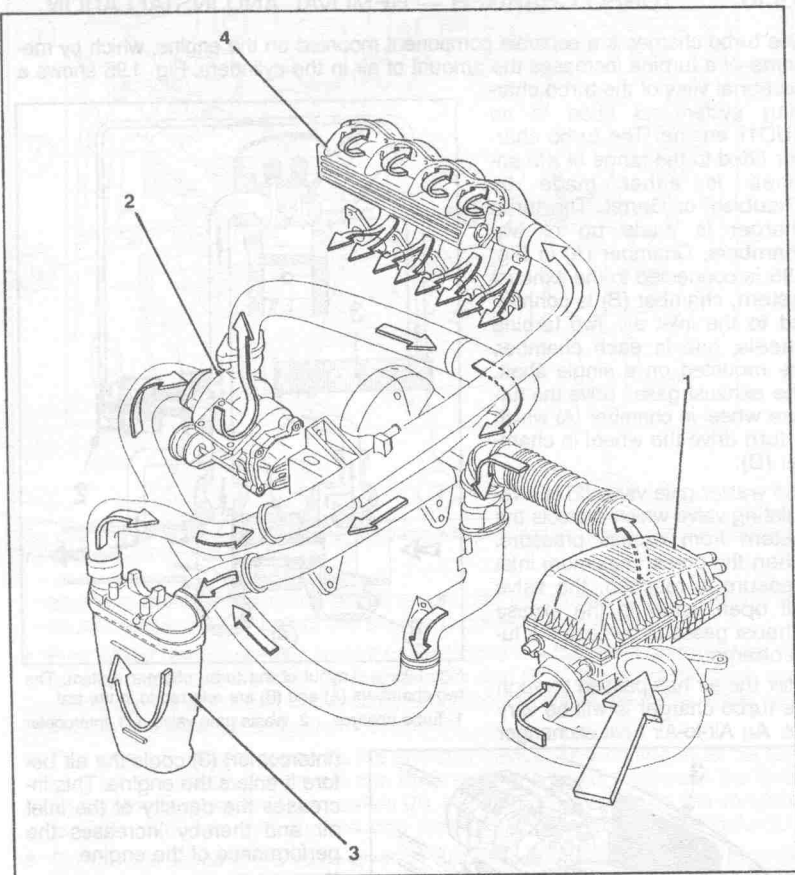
Layout of the turbo charger system (DK5 engine).
